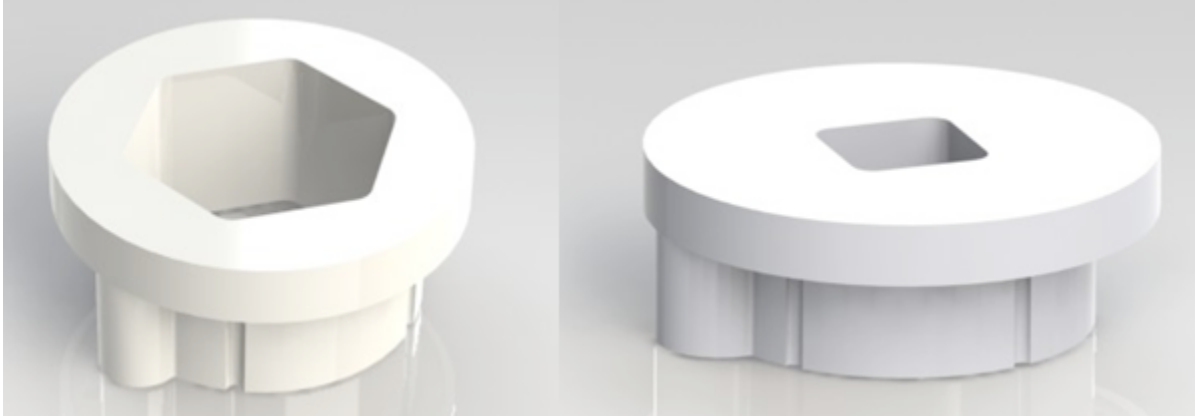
Small adapters pieces that attach gears to the shafts in the TEE handle.
